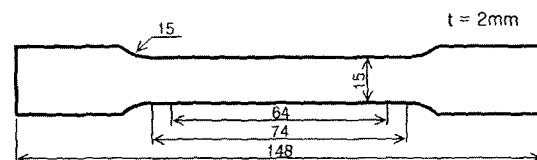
The shape and dimensions of tensile test specimen (unit: mm)
